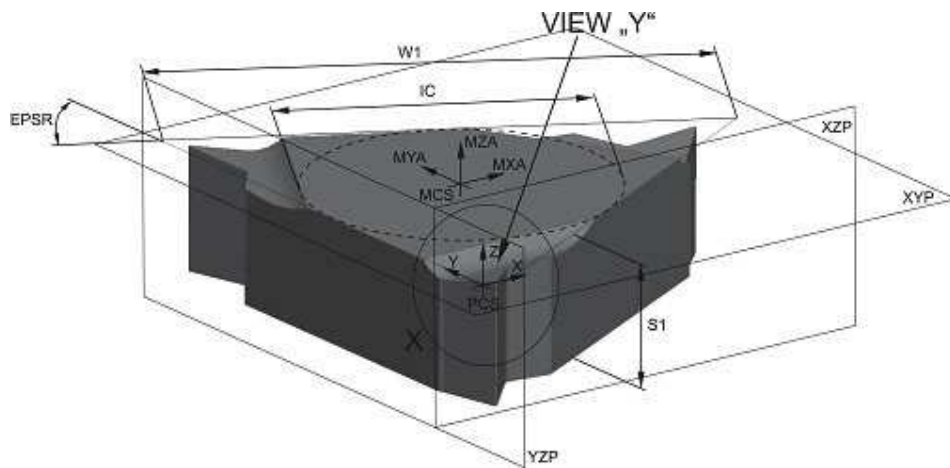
Threading insert with three cutting edges, one tooth: basic model
